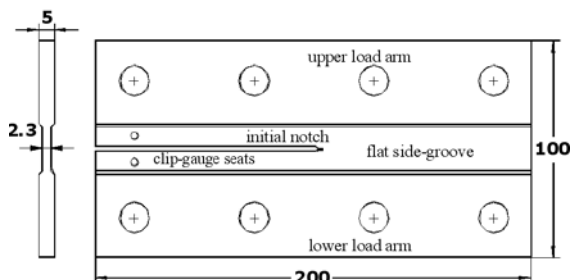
Geometry and design dimensions of tear specimen used in this work.
